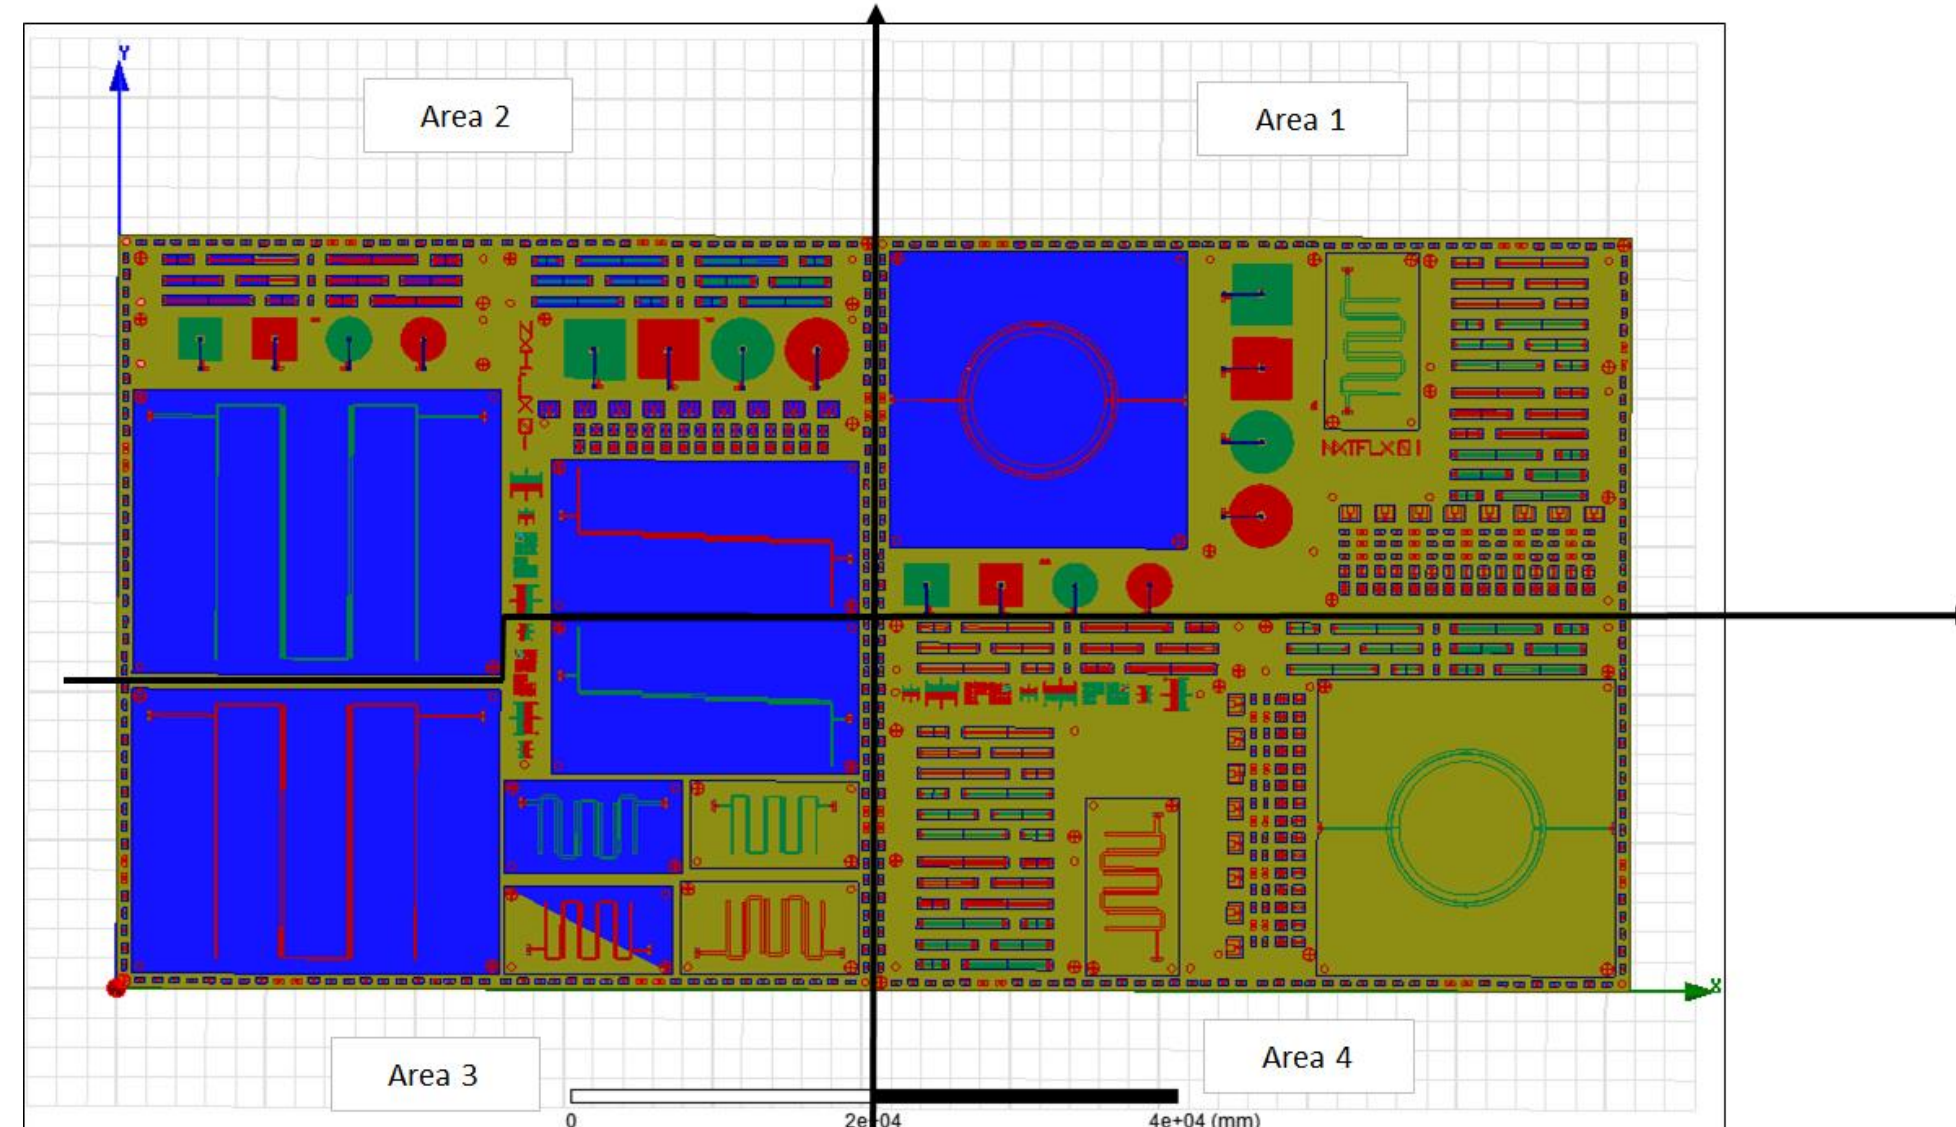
CAD design of test frame, with structures fabricated only in copper and pads for the addition of printed elements.
